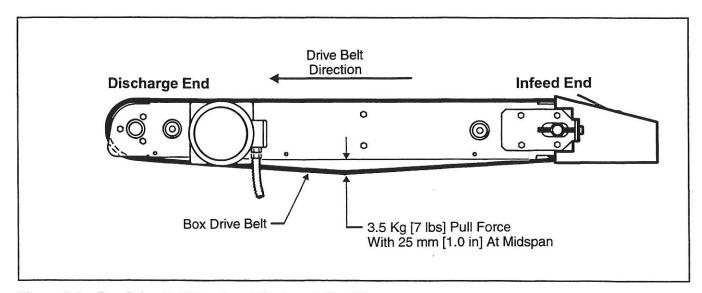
Box Drive Belt Tension Adjustment, Top View
